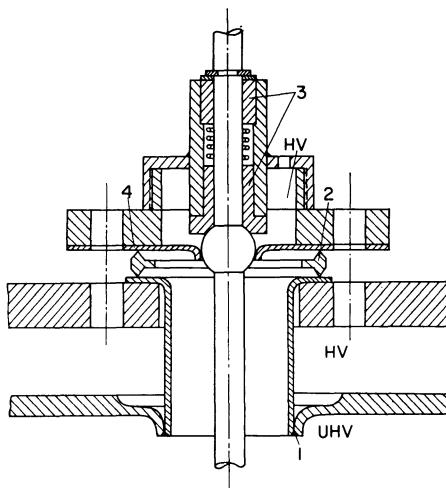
Rotary seal for ultra-high vacuum double chamber. After Ehlers³³¹ (Courtesy of Pergamon Press)
